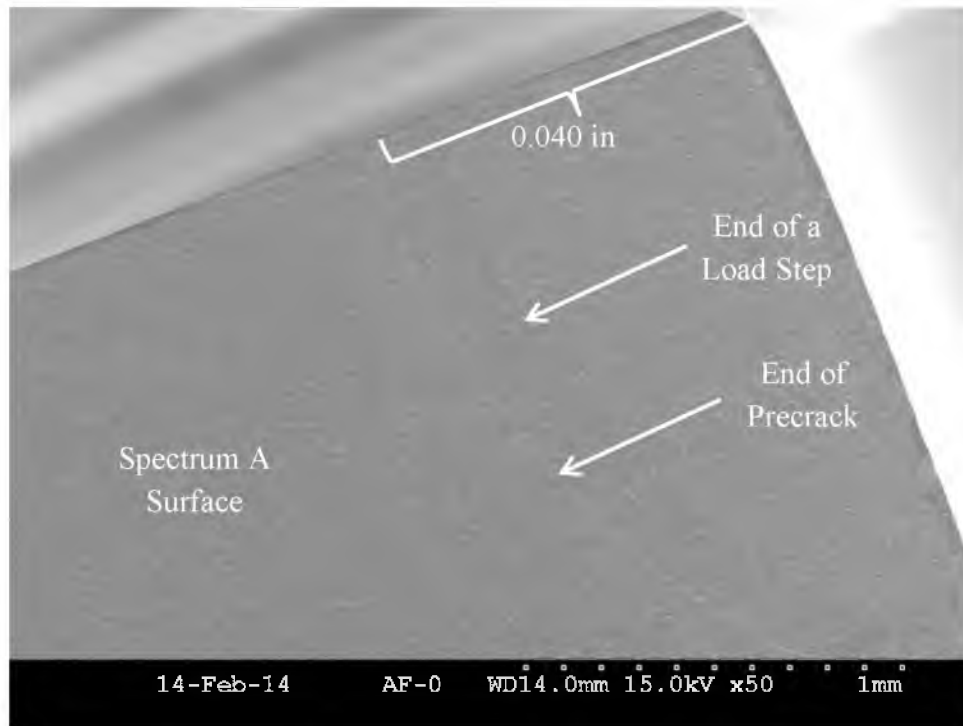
Wide View of GT270-7 Fracture Surface
